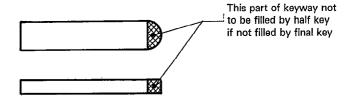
Shaft keyway¹⁾ machined with end mill cutter
